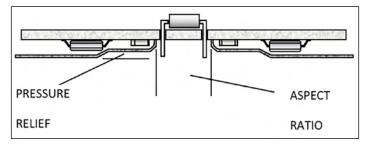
Bottom side surface mount component heights can drive thicker pallet requirements and further impact the ability of the solder to flow in and out of the pocket.
